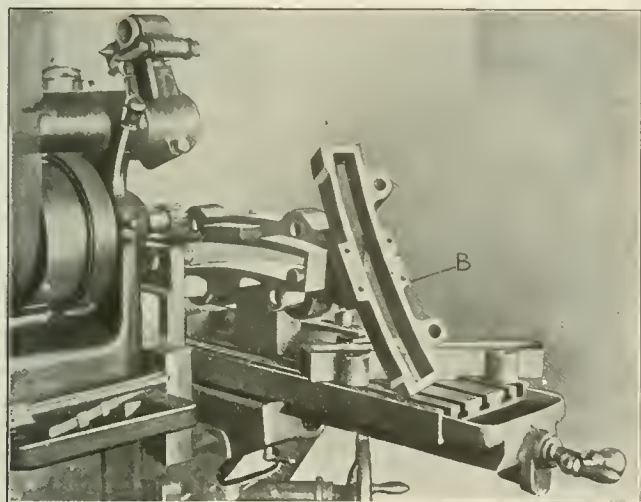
Drilling Jig shown in Fig. 6, set up and in Operation
